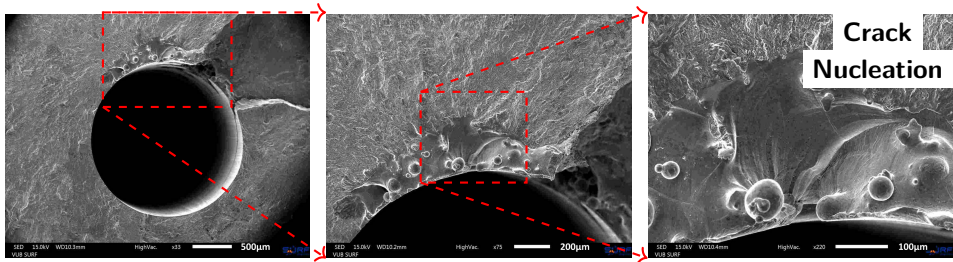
SEM images of the fracture surface of Specimen 16 (AM material with printed capillary after drilling operation). The drilling operation did not sufficiently remove the surface roughness of the printed capillaries and therefore did not solve the initiation issue around the capillary.
